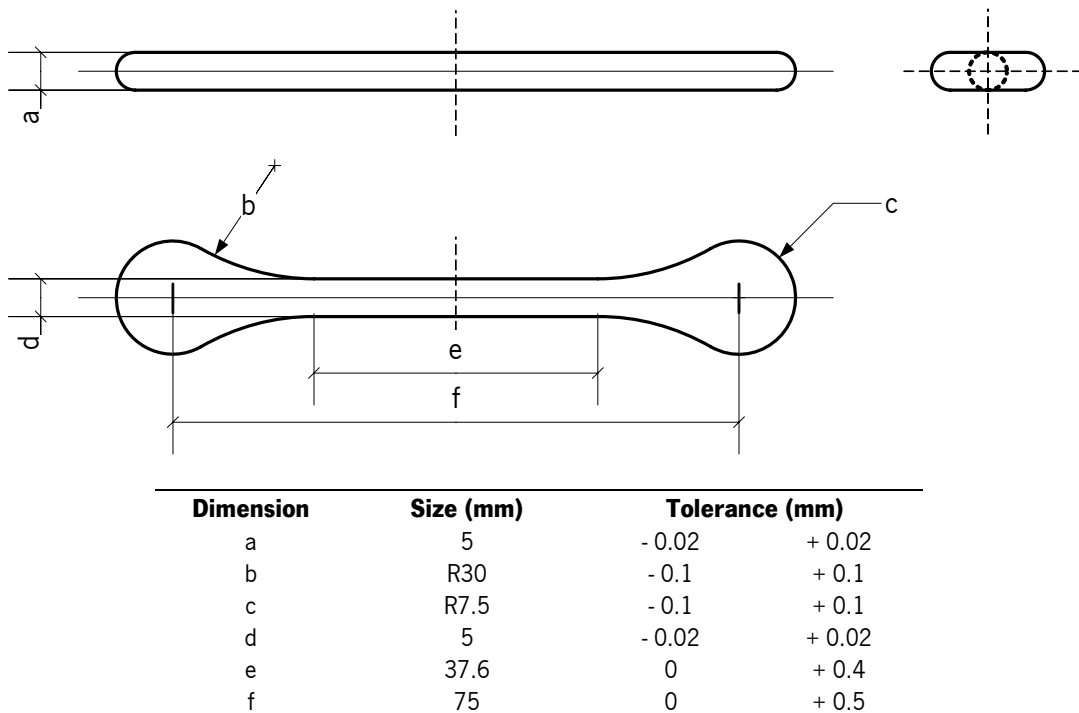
Cavity drawing for moulding of tensile test specimens [218].
